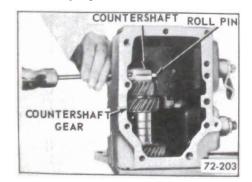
Removing Countergear Shaft Retaining Pin
